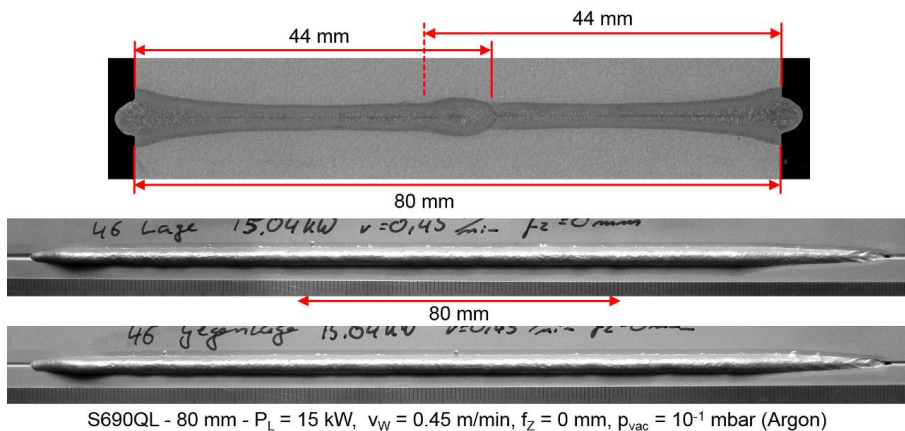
Connection weld on 80 mm thick plates of S690QL in double-sided, single-pass technique
